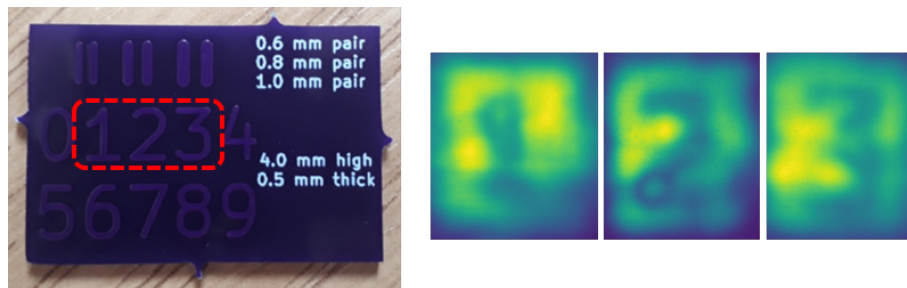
Inspection of printed circuit boards (PCBs). Optical (*left*) and THz images (*right*) of copper tracks in a custom PCB. The digits are all 4 mm high with 0.5 mm thick lettering. The copper tracks are visible as darker regions in the THz images when imaged through the surrounding resin board.
